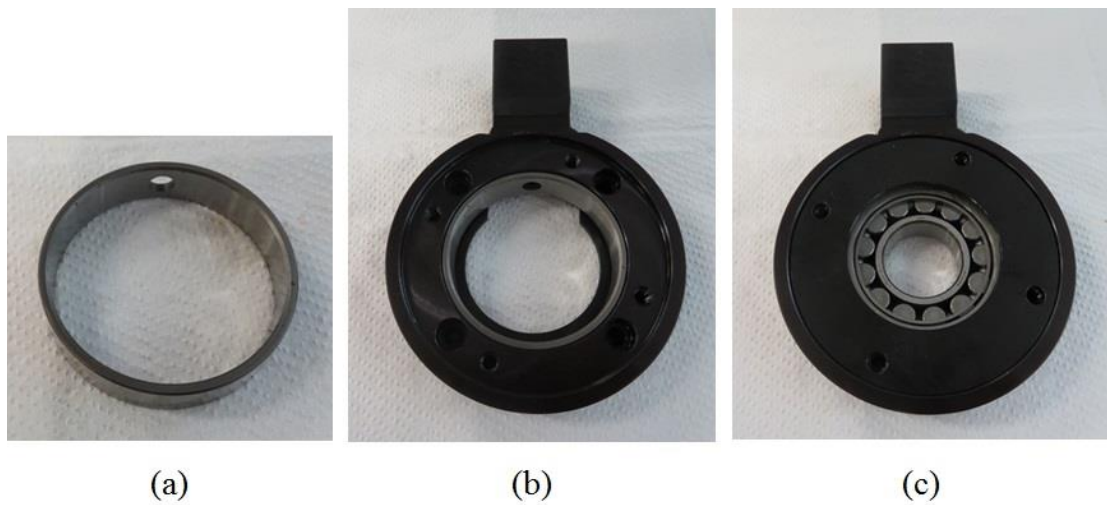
Pictures of the housing for bearing test: (a) the sleeve, (b) the sleeve with the housing, (c) the assembled housing with the sleeve and the test bearing.
